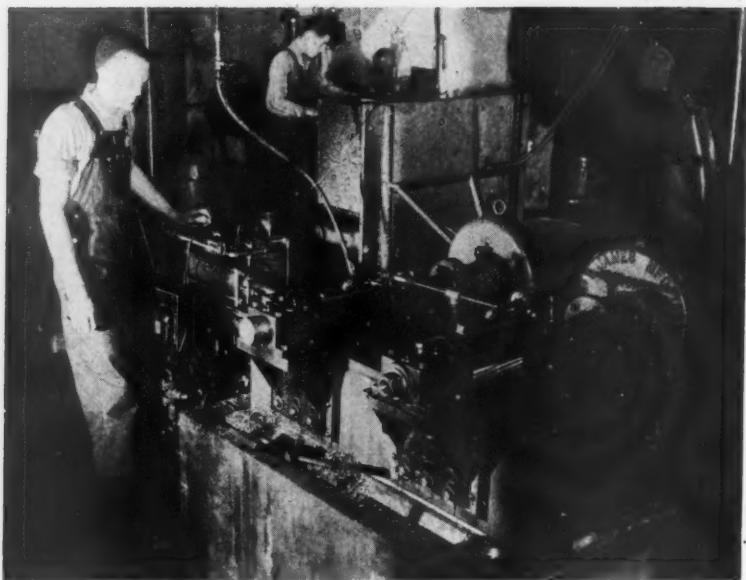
TWO SPINDLE MILLING MACHINE has motor driven arbors and a hydraulic ram to operate the reciprocating bed. Valves in oil line provide forward and reverse motion and speed control of bed. Set up here is for slab milling and serrating.
